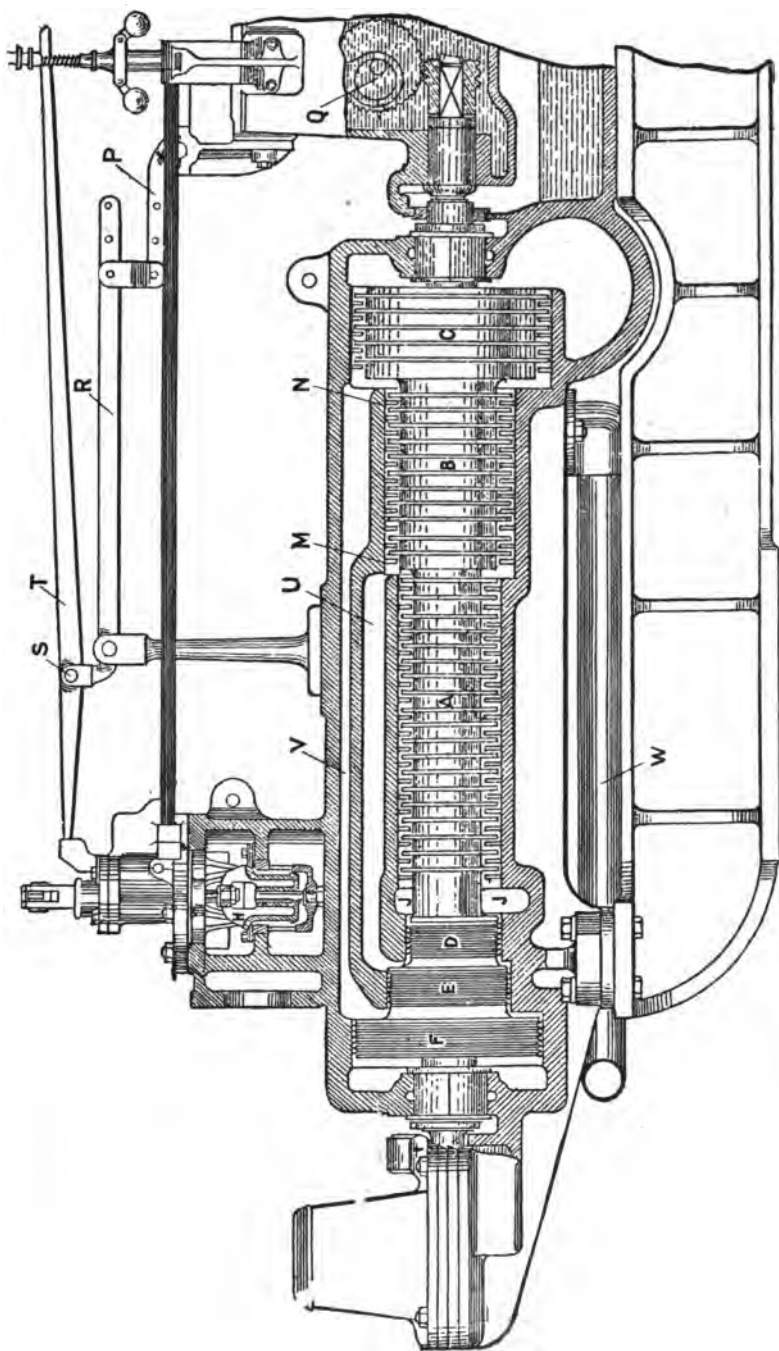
Vertical Section of Parsons Parallel-flow Steam Turbine.
